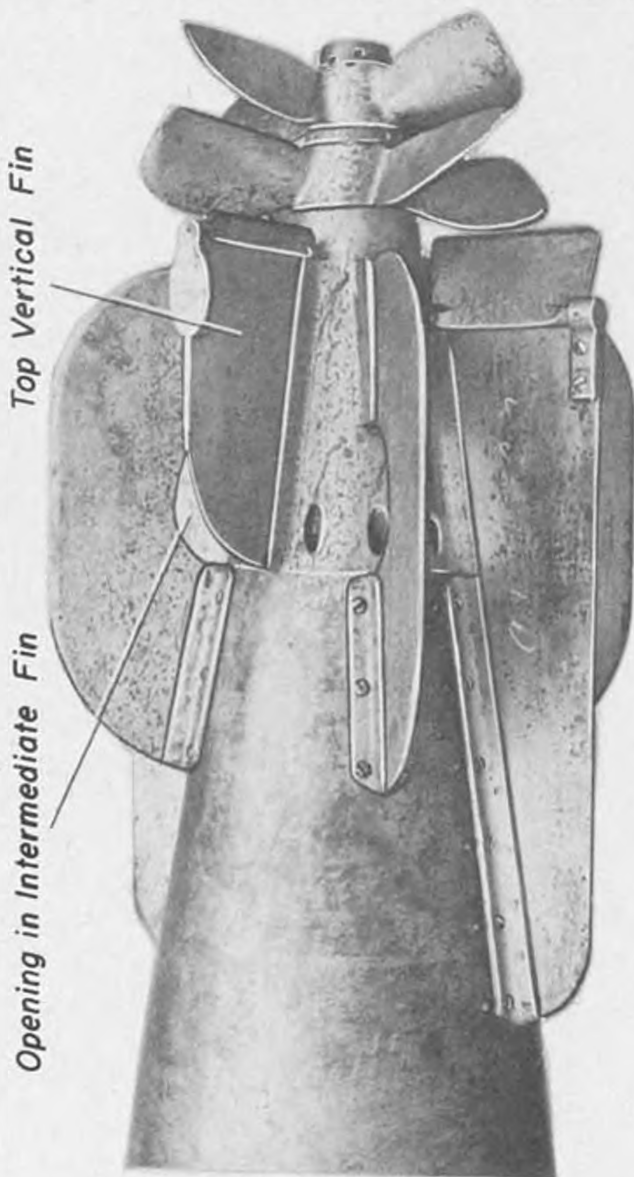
Torpedo Type 91 Mod 2, Tail Section
